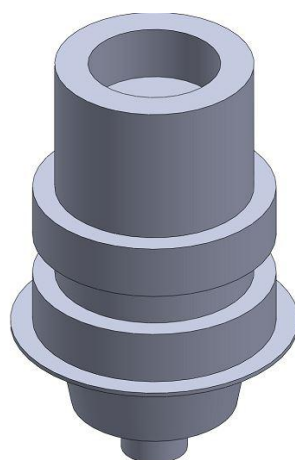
Double collar collet chuck holder manufactured by CEF process
